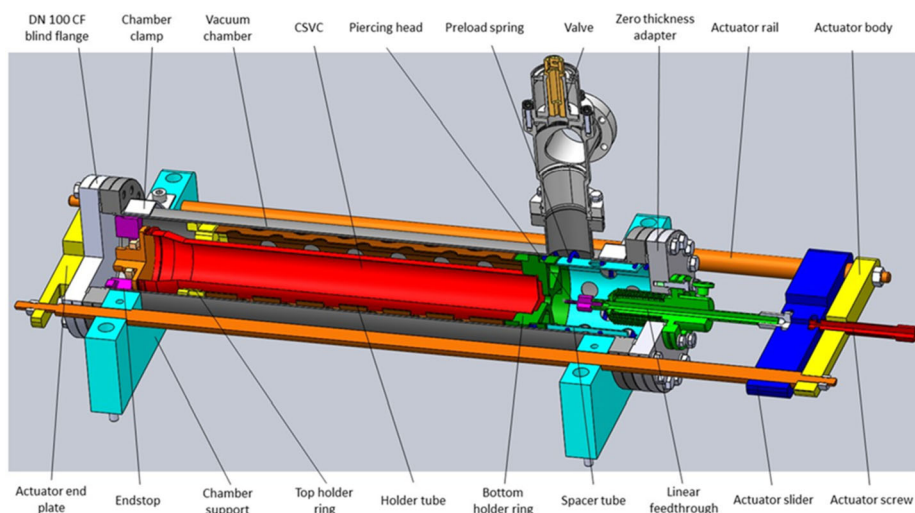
CAD view of complete piercing tool design. The design was manufactured and executed at ESA ESTEC including production of bespoke machined components integrated with COTS items
